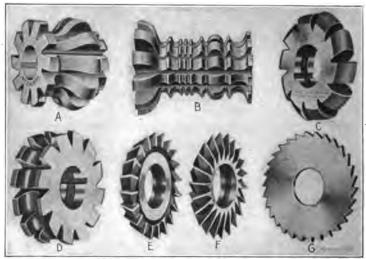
Formed Cutters, Angular Cutters, and Slitting Saw
